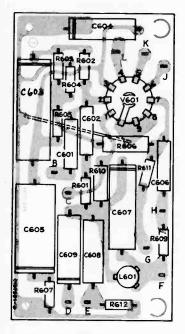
PW600 Horizontal Oscillator Assembly Layout
